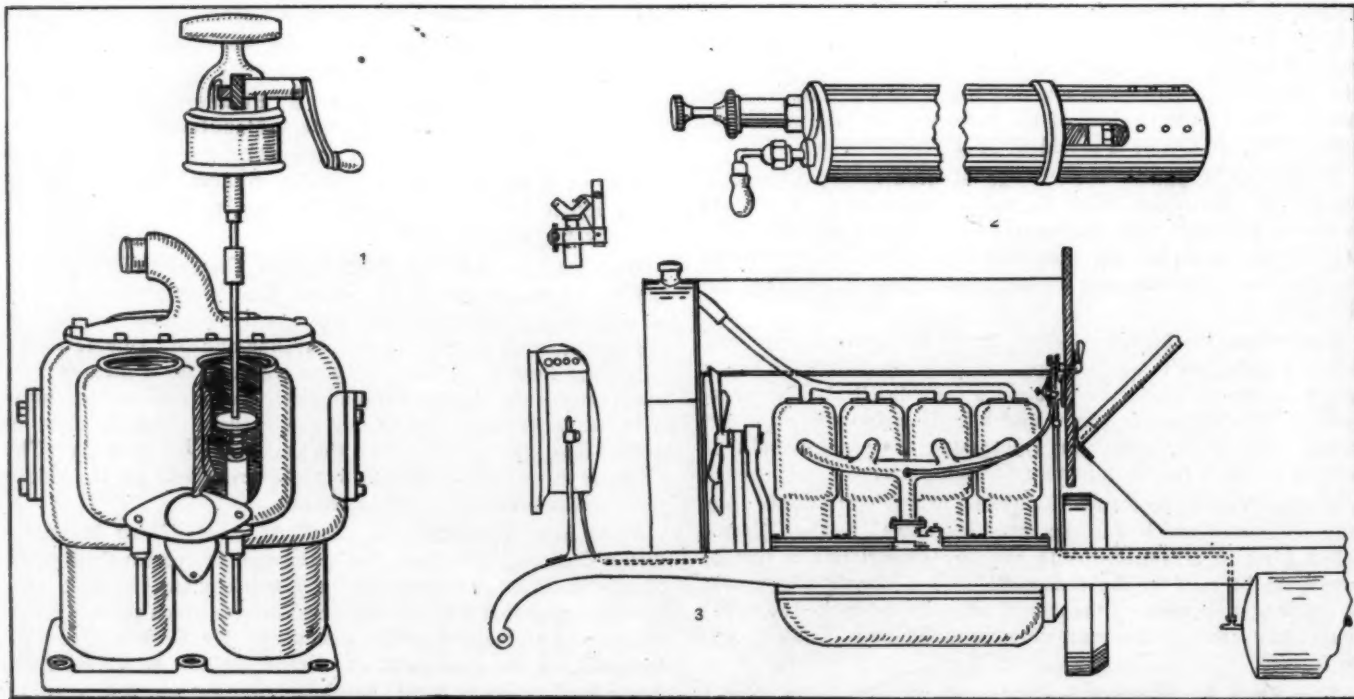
Parsons valve grinder. Fig. 2—Turner gasoline torch. Fig. 3—Dual starter and lighter
